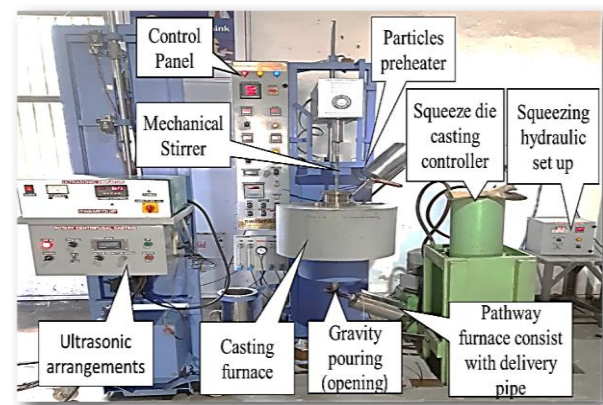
The gravity pouring stir-ultrasonic-squeeze casting set-up
